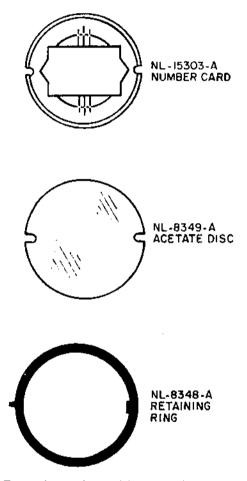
Escutcheon Assembly for Leich Dial Blanks and Generator Handles.
